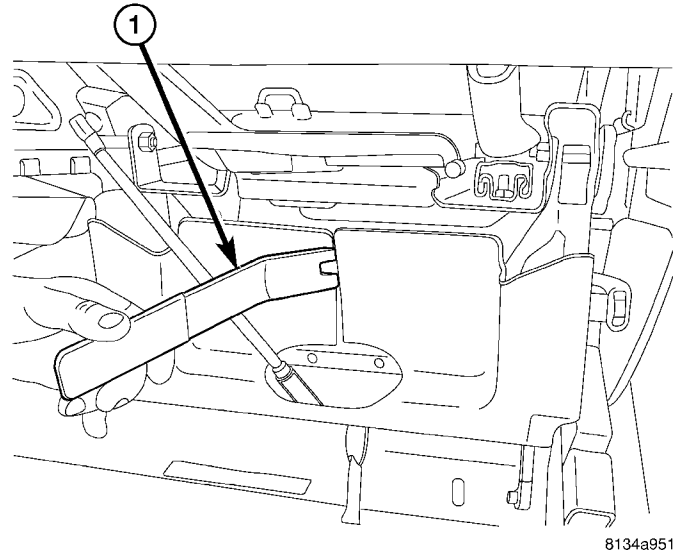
SECOND ROW LOWER FRONT SHIELD
